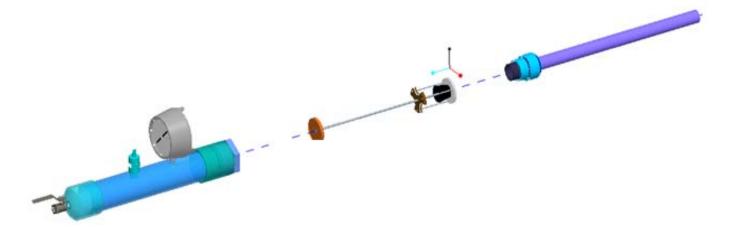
Gun, Valve Assembly and Barrel (Exploded View)
